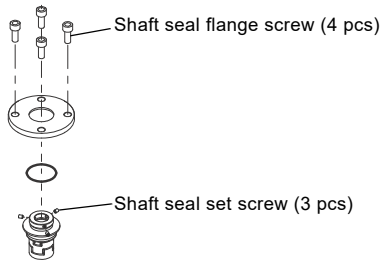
Shaft seal flange screws and shaft seal set screws for CR, CRN 32, 45, 64, 90, 120, 150
